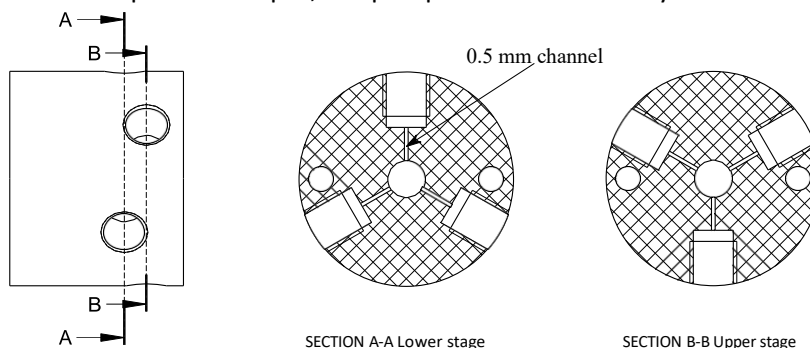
Section view of the PCTFE valve seat revealing the microchannels - VD2-6
